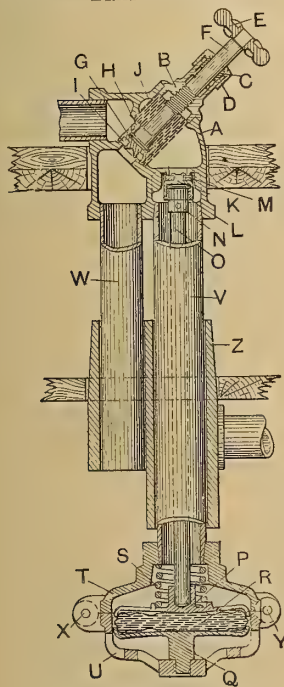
SECTION OF STEAM TRAP No. 138.
